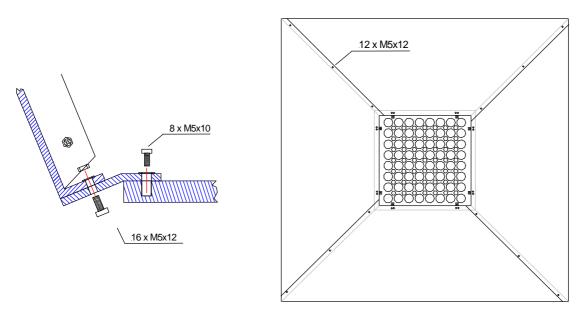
Mounting an antenna small enclosure (Example: MFAS)
